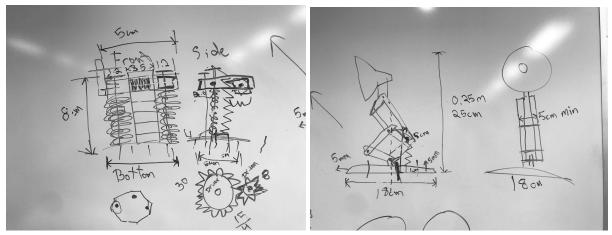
Technical Drawings. *This figure shows the overall scaling process to check for clearance and design parameters.
